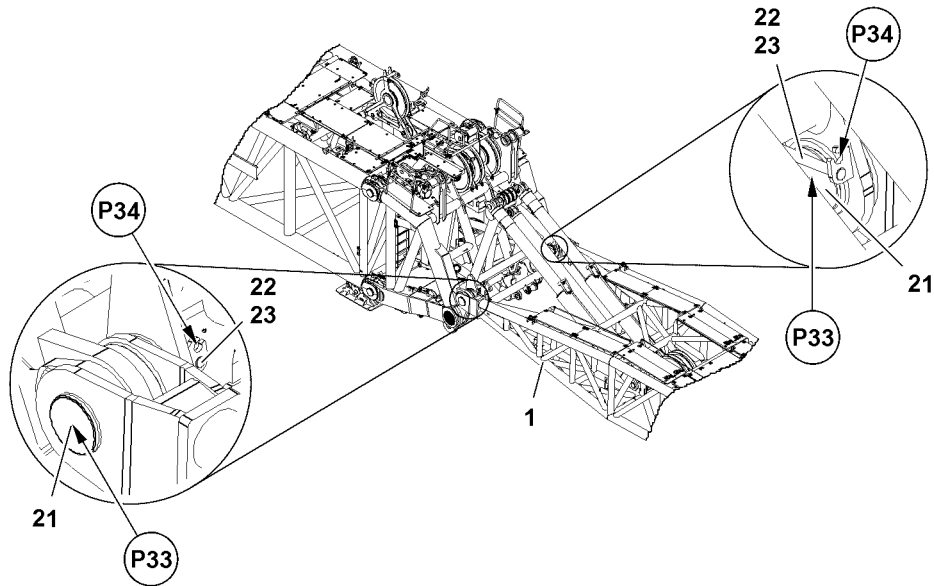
Disassembling WA-frame 1 on the end section — Unpinning WA-frame 1 on the end section
